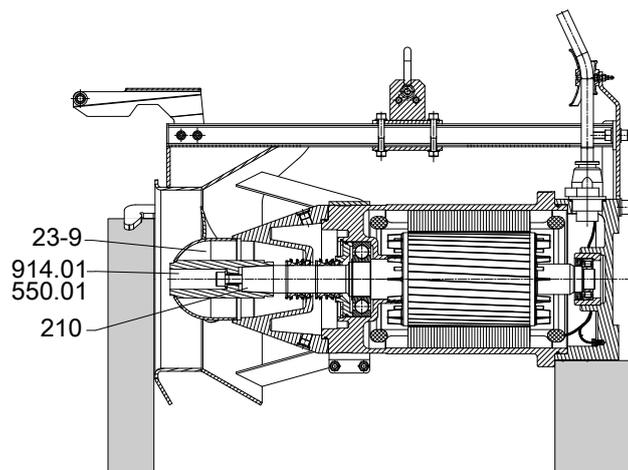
Mounting the axial propeller of an Amaline 300 with motor 8 6
